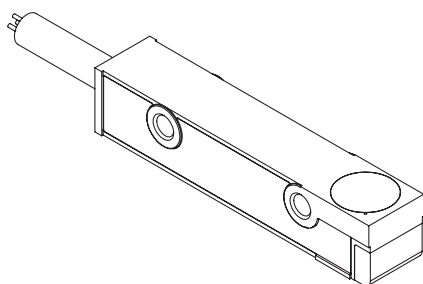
Limit switch for linear axes HM/HT/HC
